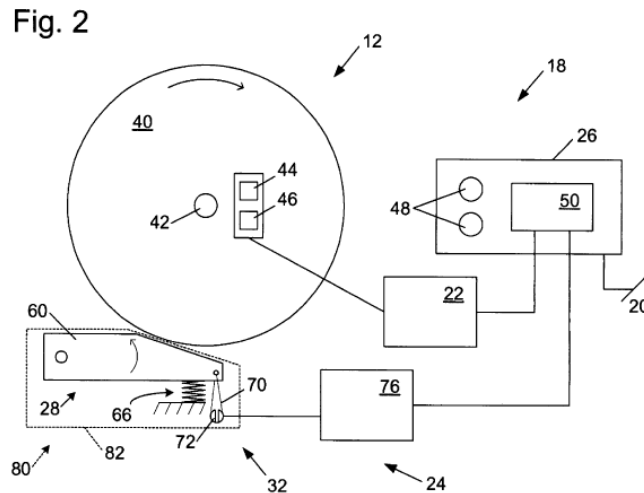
illustrates a cutting tool such as saw blade 40 and brake mechanism 28 having pawl 60 for engaging and stopping the blade when a dangerous condition is detected. *Id.* at 5:4–33. Within this embodiment, the pawl is restrained against the stored energy of the spring by a single-use fusible member or fuse wire 70. *Id.* When a dangerous condition is detected, a capacitor discharges a current through fusible member 70, causing it to melt and release the spring. *Id.* The spring forces the brake pawl into the saw blade to stop its rotation within milliseconds of the detection system
